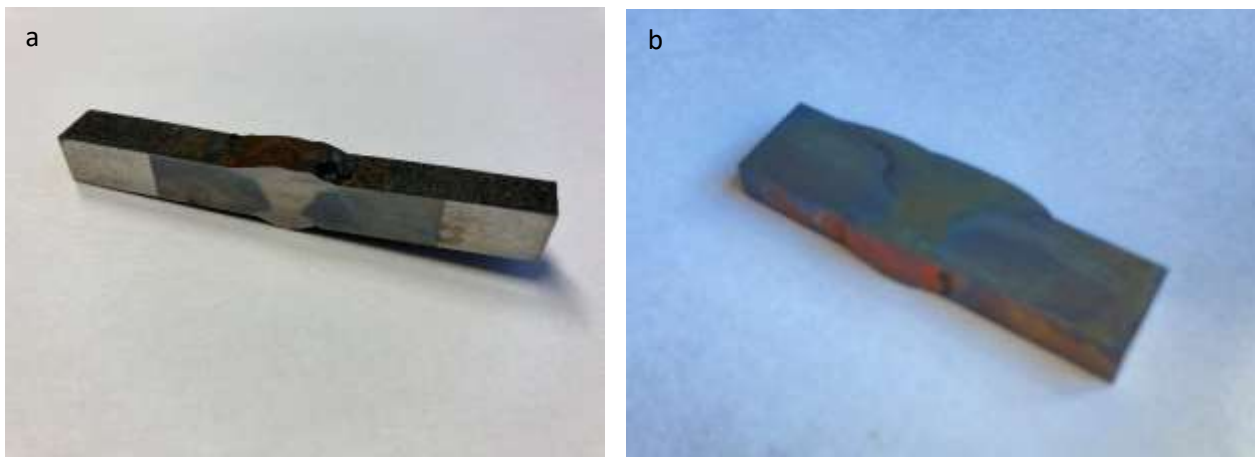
Initial welded sample slice (a), reduced welded sample slice before the epoxy resin embodiment (b)
